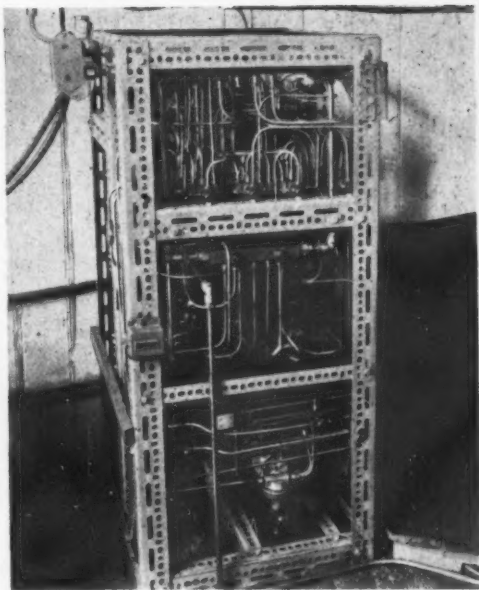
The Sequence of the Machine in Fig. 1 is Controlled by Air-operated Pilot Valves and Cylinders Housed in this Cabinet. A Motor-driven Vacuum Pump is also Incorporated
